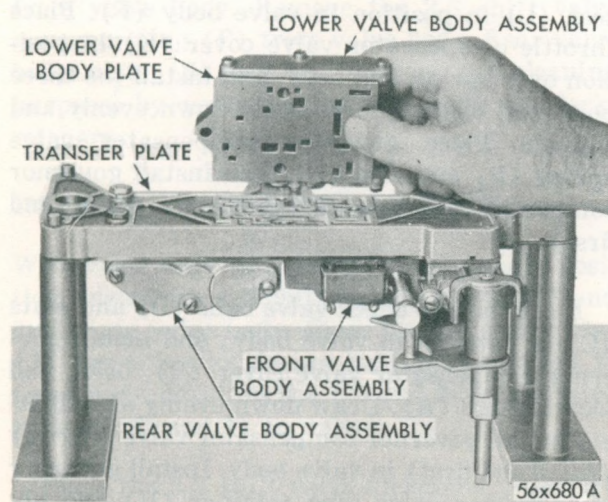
Removal and Installation of Lower Valve Body Assembly and Plate
